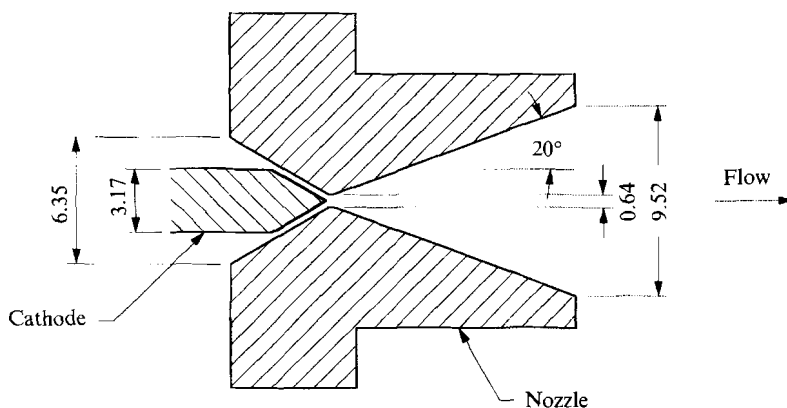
Nozzle geometric configuration (dimensions in mm).
